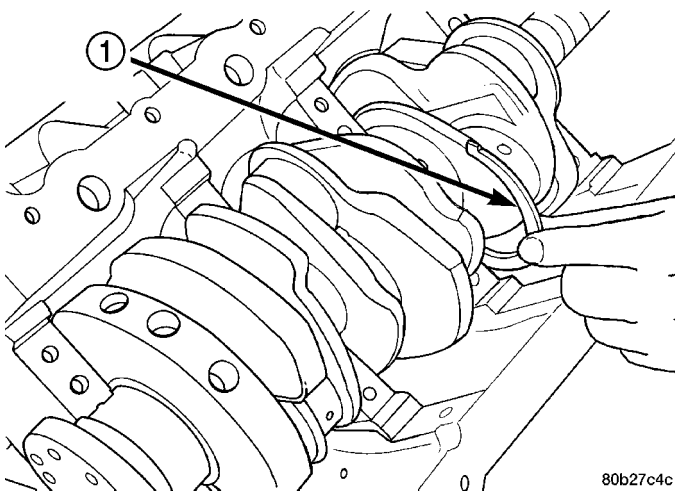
ENGINE BLOCK AND CRANKSHAFT
